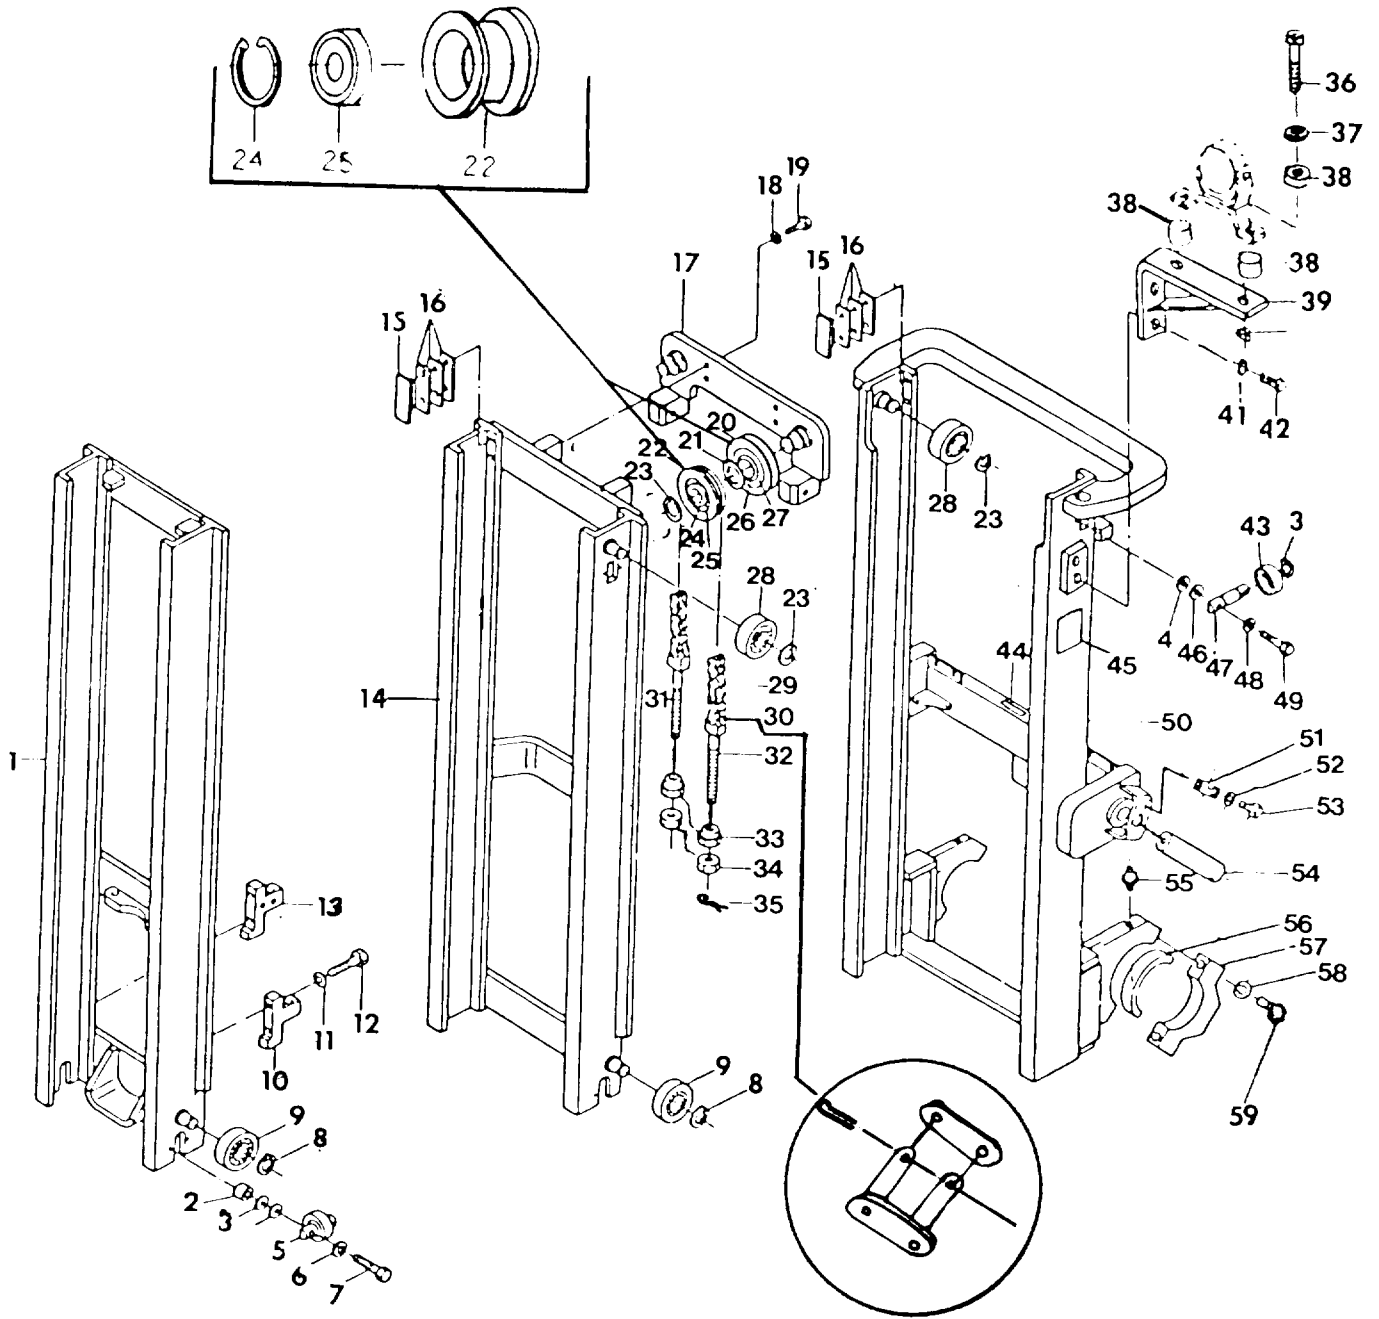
HYDRAULIC MAST ASSEMBLY
